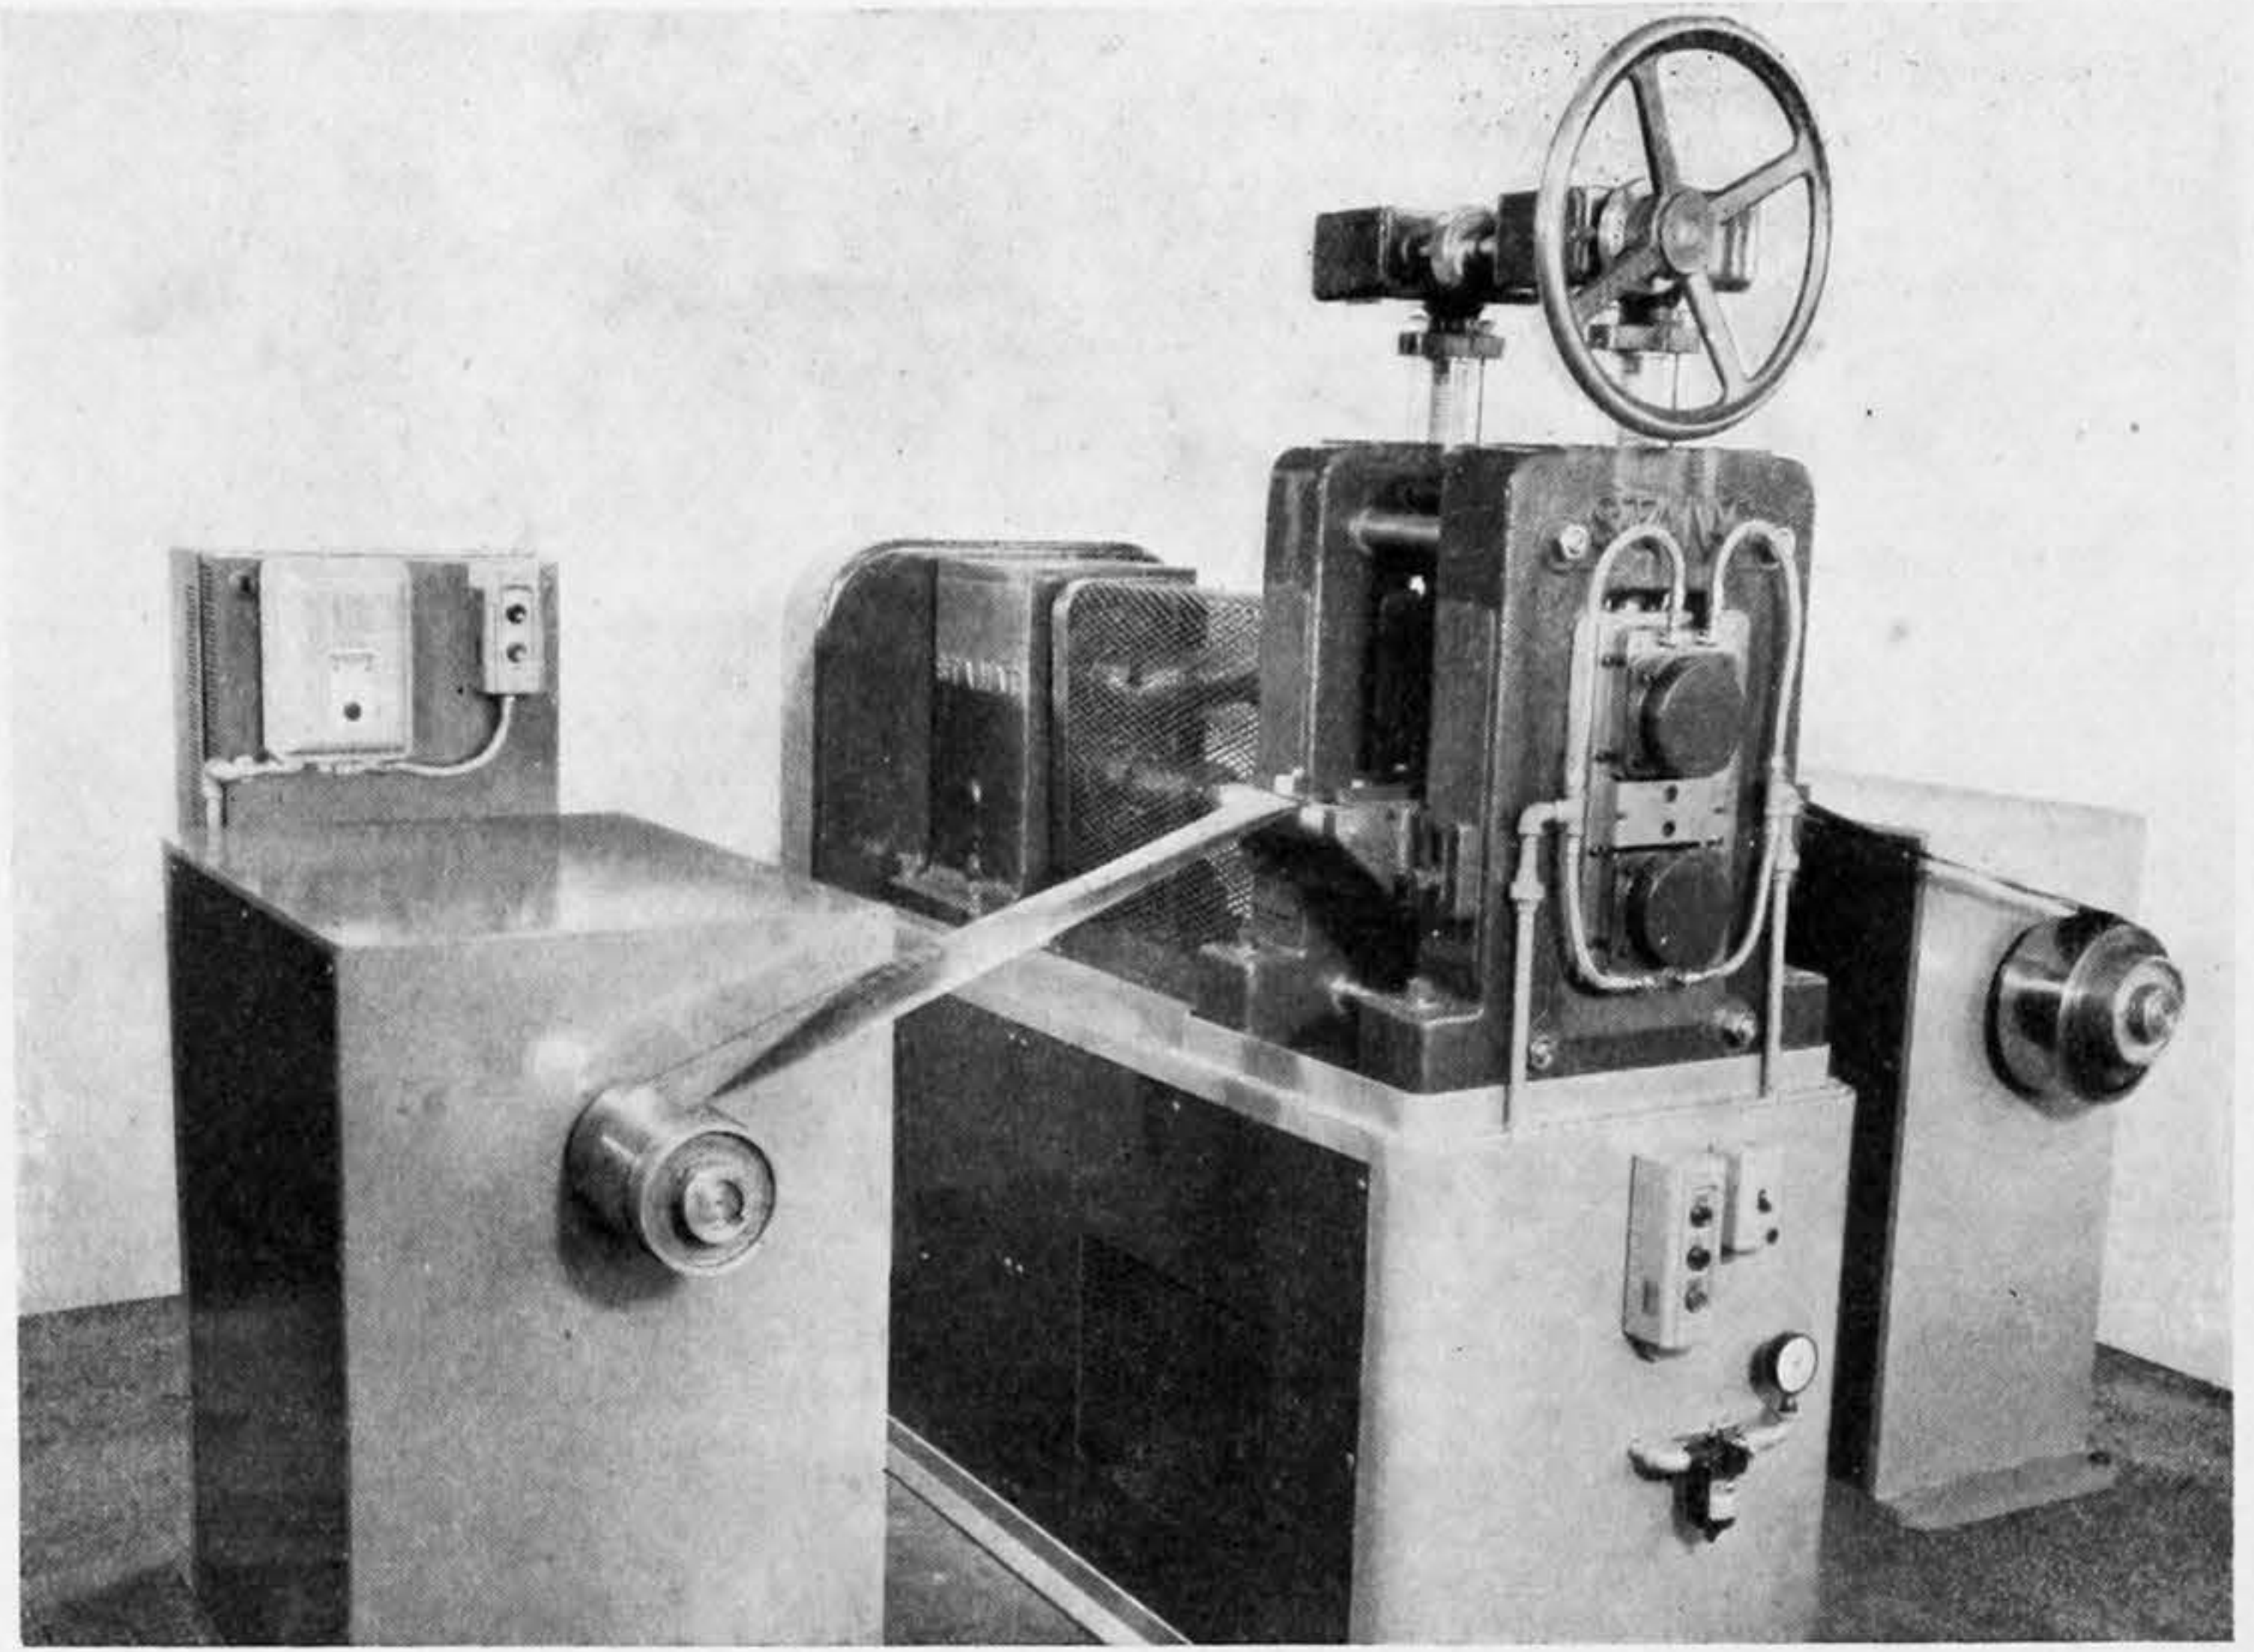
Cold reduction of light gauge "Hipernik" strip with application of front and back tension
